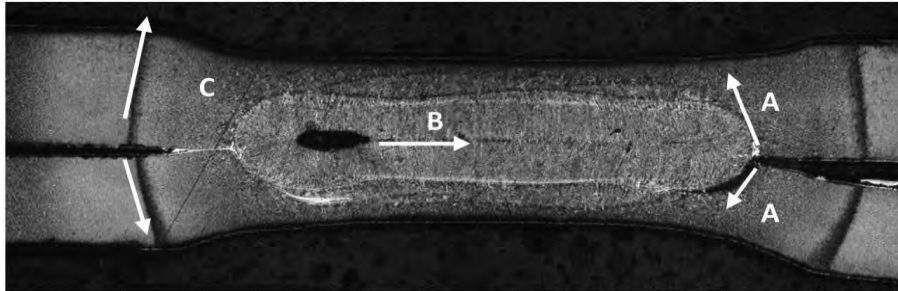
The typical fractures of the weld joints
